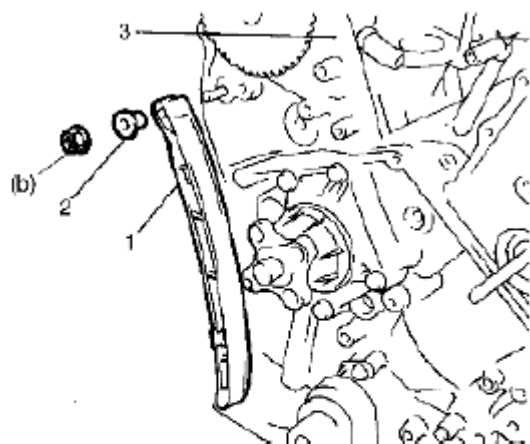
Installing RH (No. 2) Bank 1st Timing Chain Intake Camshaft Sprocket
